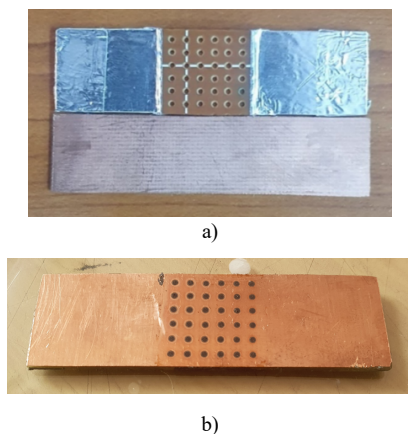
Contact samples: a) before ZrCu coatings deposition; b) after ZrCu coatings deposition [15].
